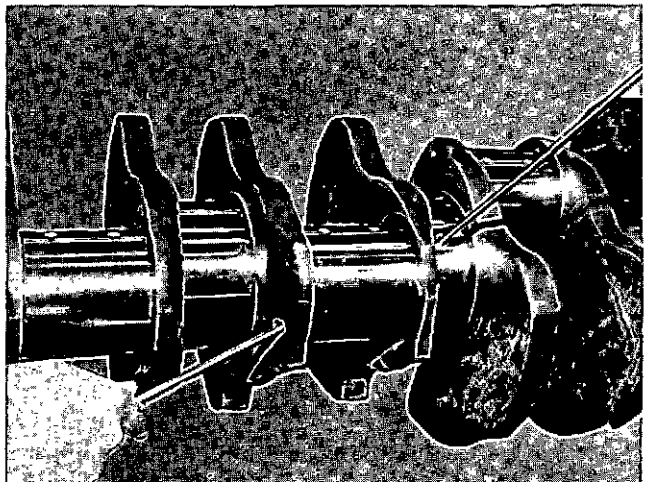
, V40141. Cleaning drilled oil passages
